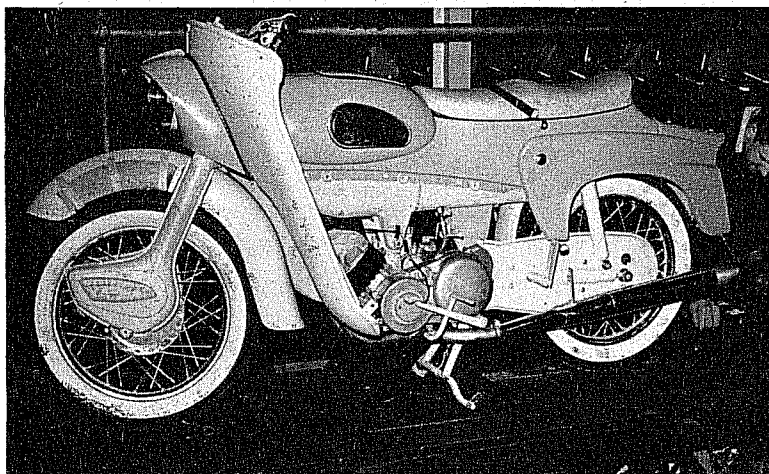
(below).—A "Leader" nearing the end of the assembly line
